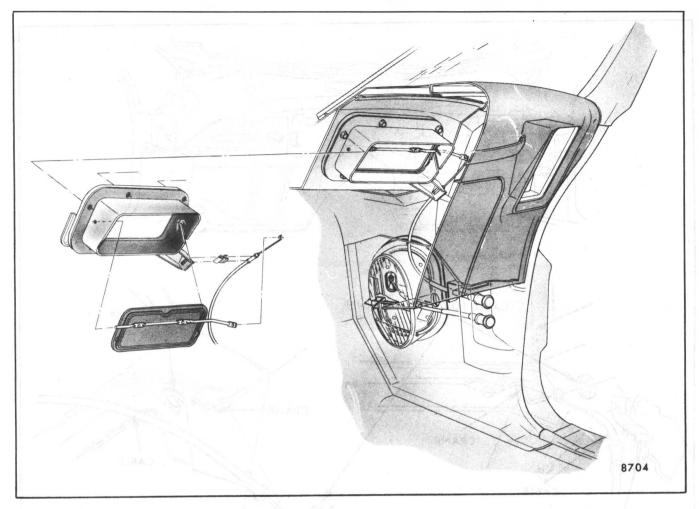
Shroud Center Duct High-Level Air Outlet and Door - "F" Styles
